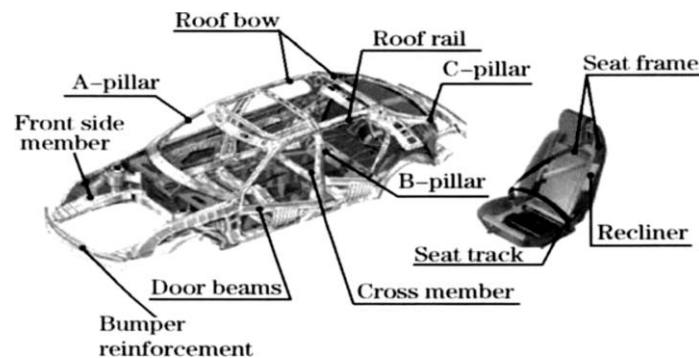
The automobile parts in which DP 600 steel is used [3].
